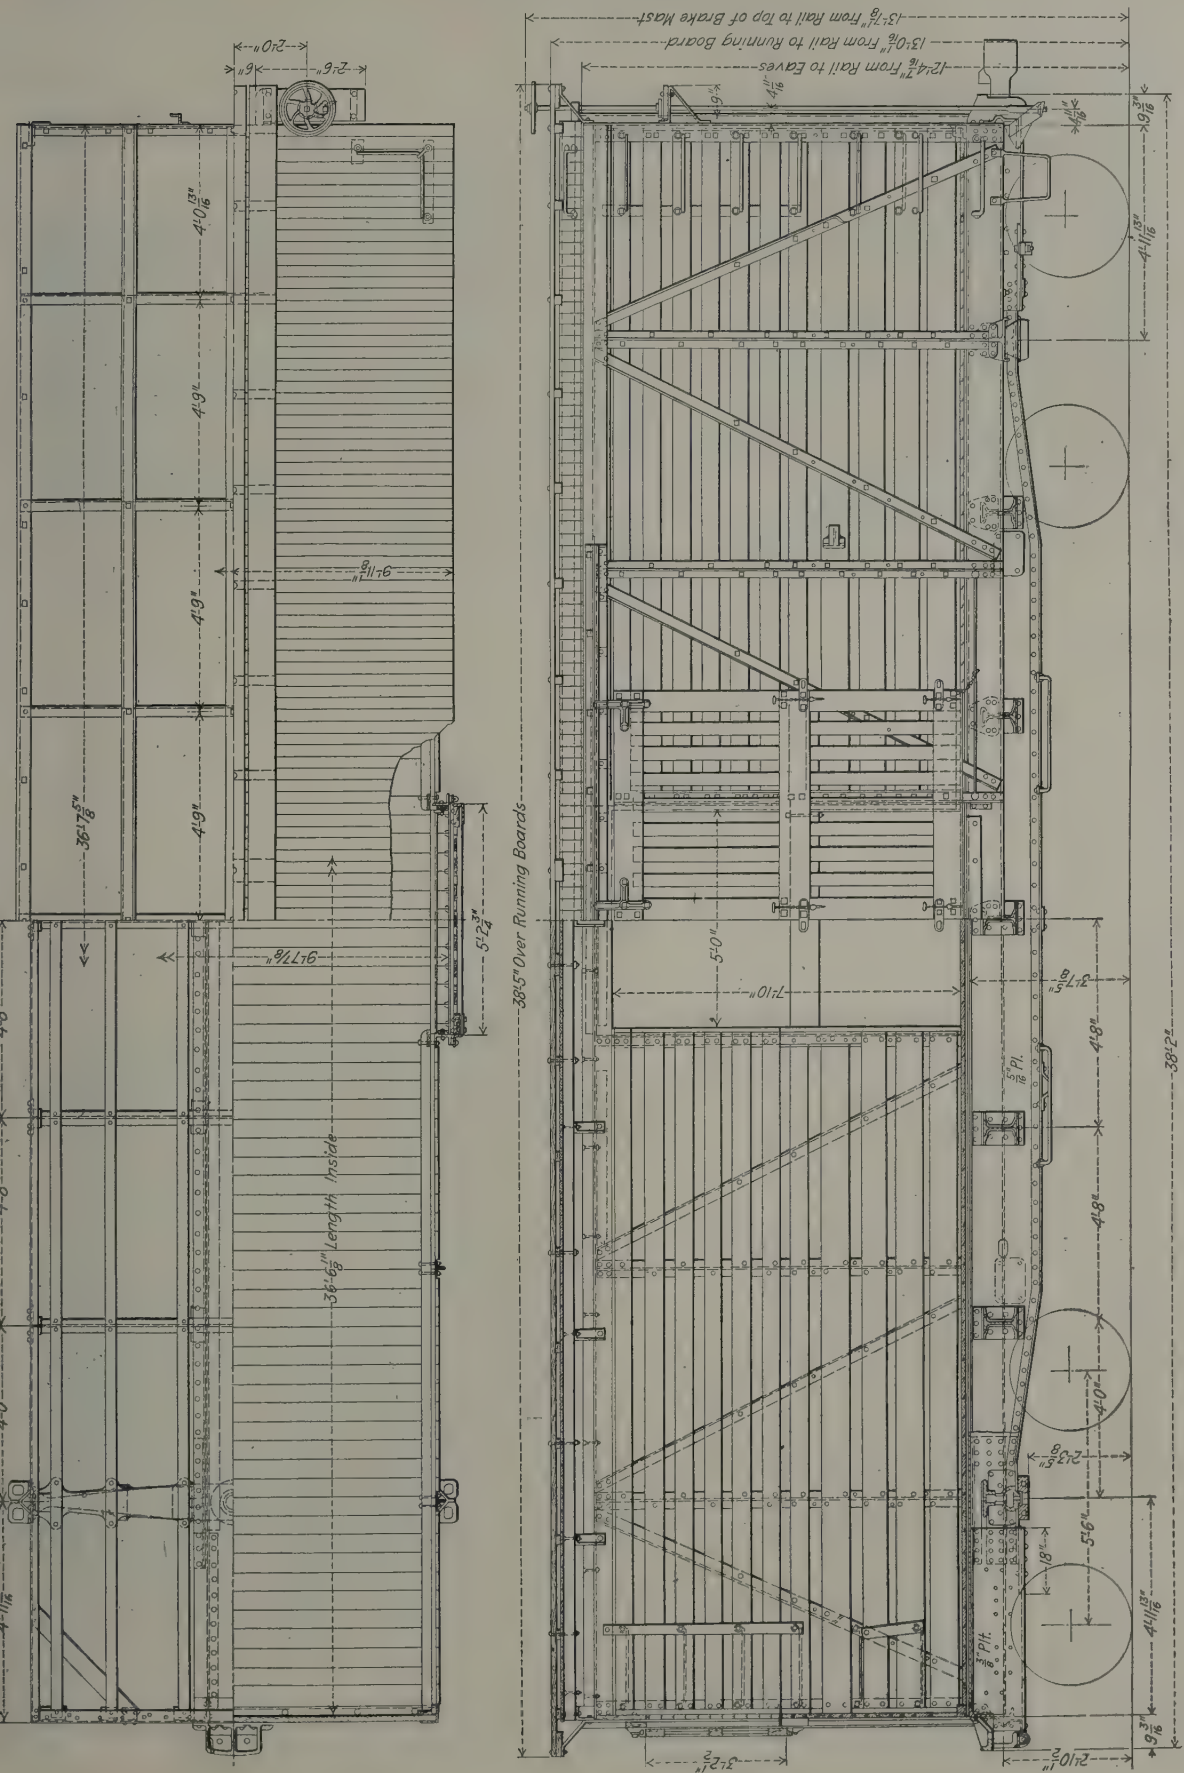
Plan and Elevation of 40-Ton Stock Car Shown in Figs. 186-187. Builder, The Ralston Steel Car Company.
